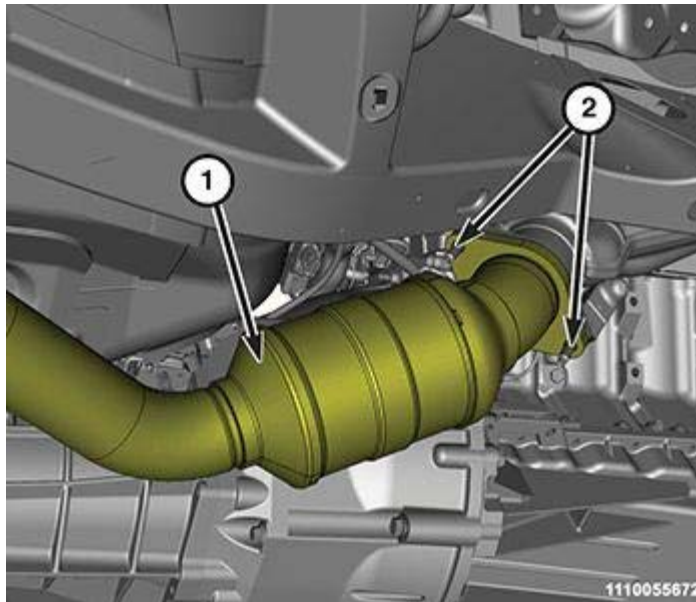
Catalytic Converter & Manifold Flange Nuts
